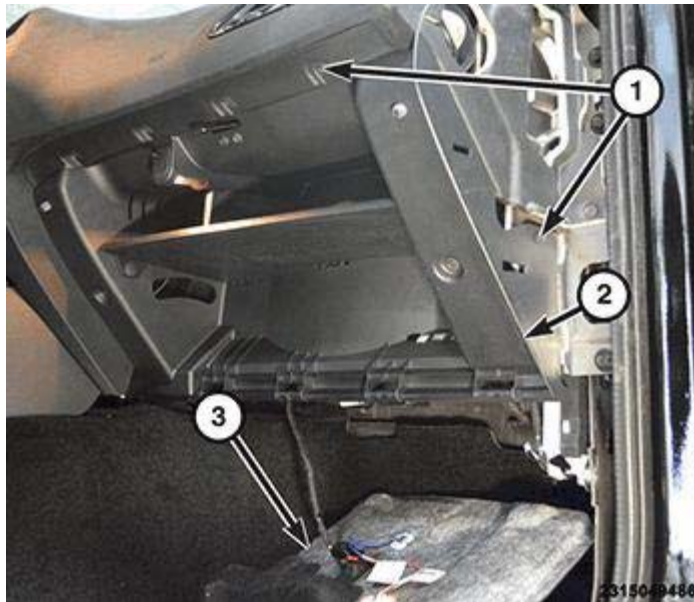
Glove Box, Instrument Panel Closeout & Screws
